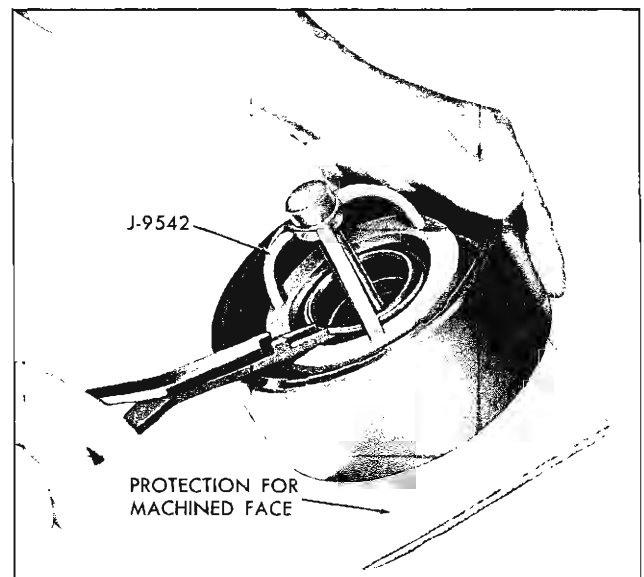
PG—Removing Clutch Spring Retainer Snap Ring
